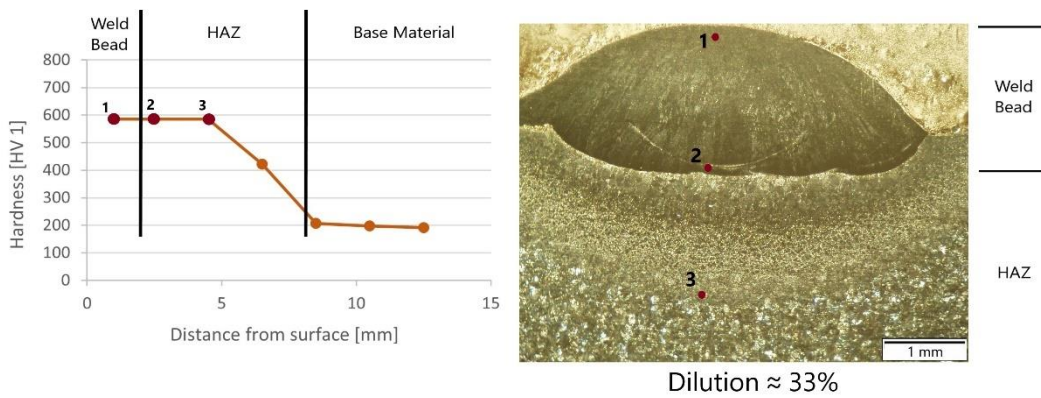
Welding Current: 130A; Welding Speed: 500mm/min; Powder Feed Rate: 20g/min (59)
